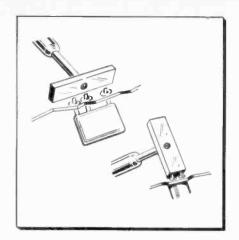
A bar-type tiplet may be used to remove PEC terminals from a printed board.
